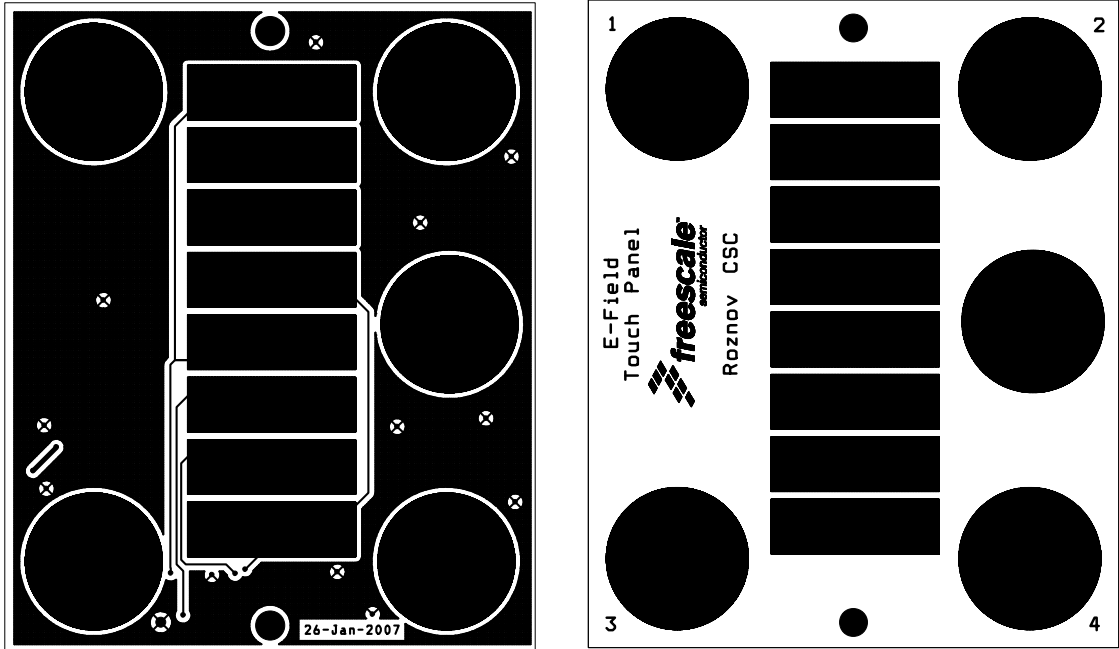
Slider Touch Panel, Parts Placement and PCB Layout, Top Side
